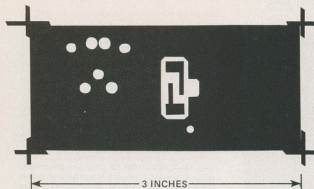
BOTTOM OF MIXER BOARD shows two capacitors (C72 and C73) formed from PC-board material.
